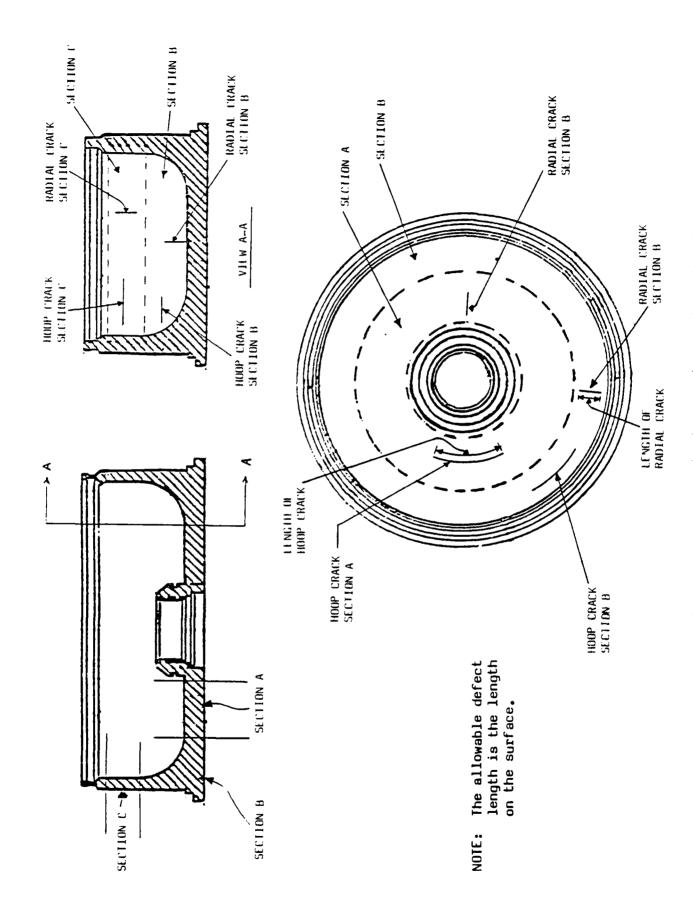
Schematic of 120-mm stub case showing sections and crack orientations.
